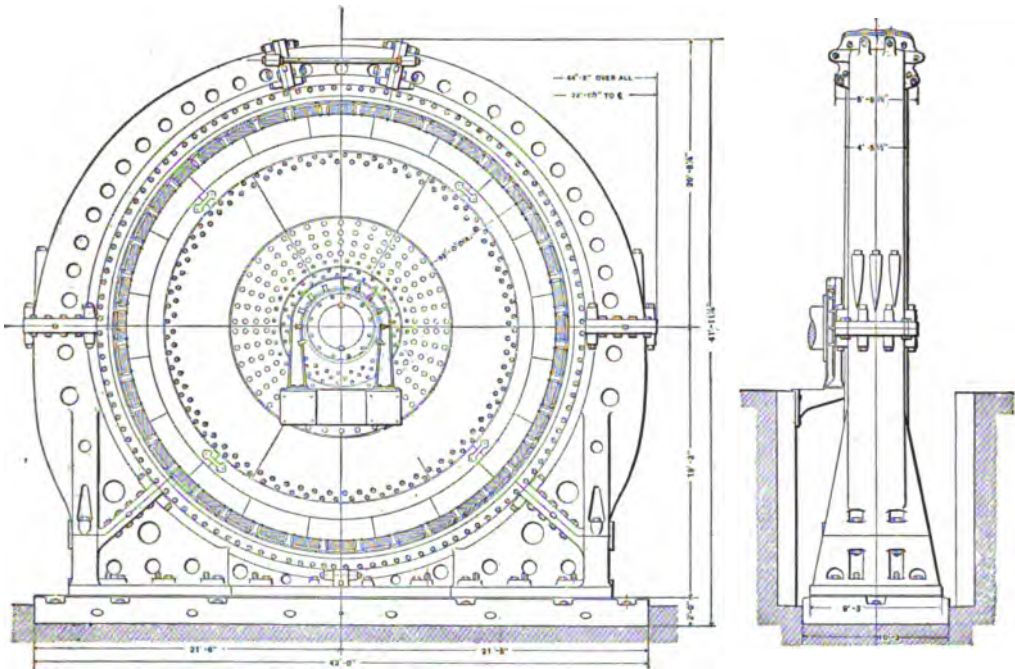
5,000-K.W. Alternator, 59th St. Plant, New York (*Street Railway Journal*).
